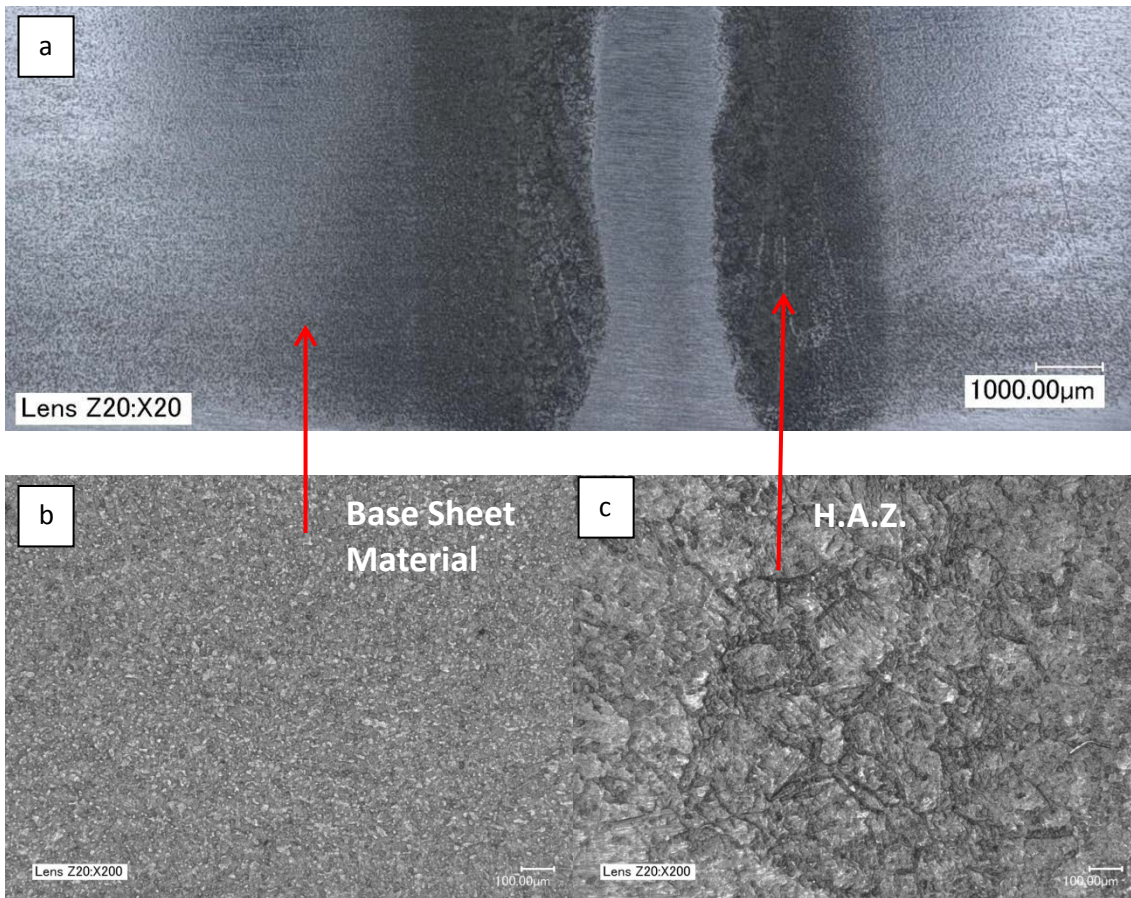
Images of Ti-834 2mm welded sheet
